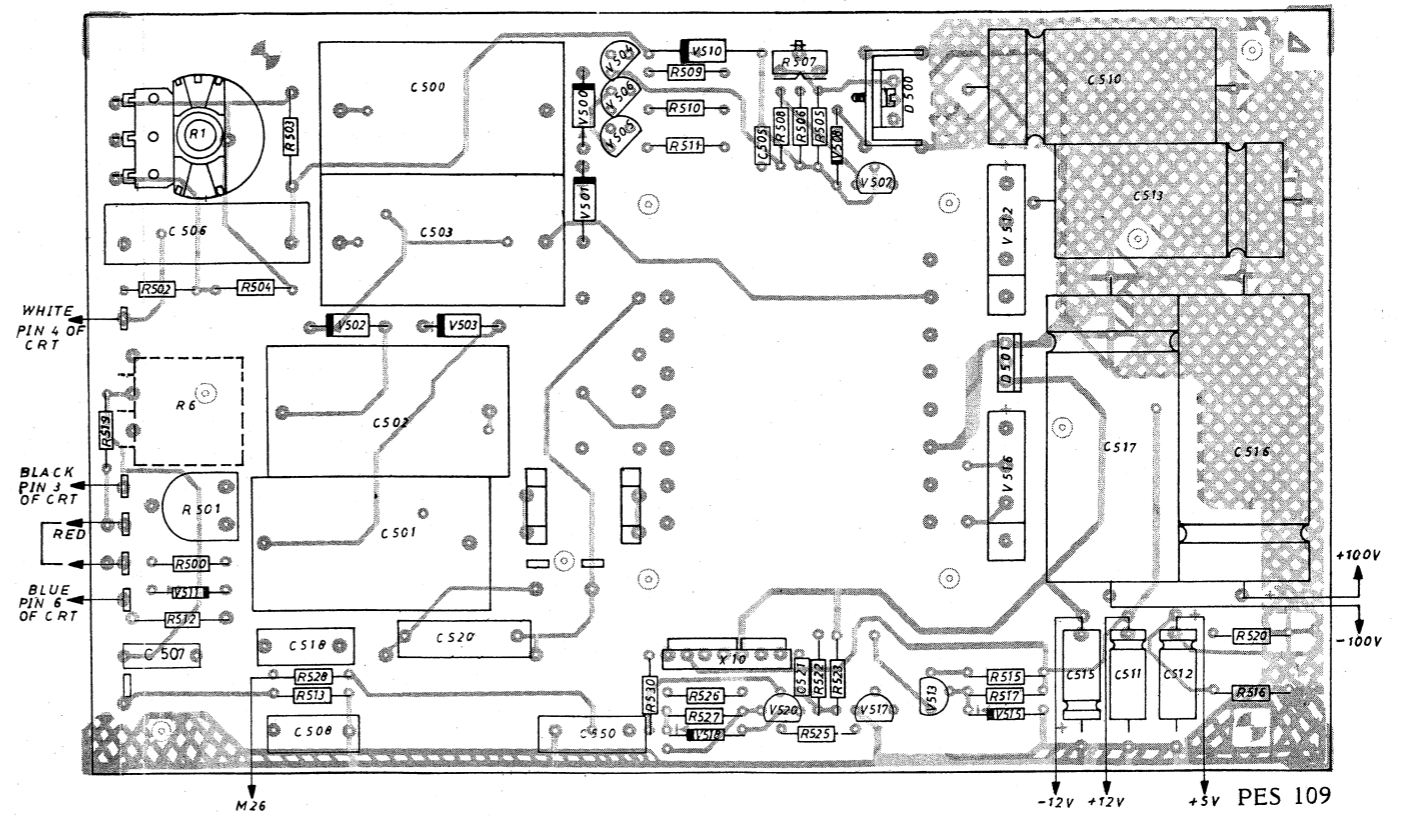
PCB OF POWER SUPPLY UNIT
